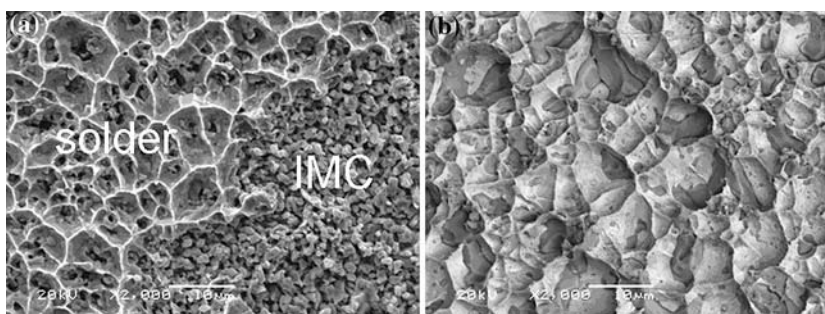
Fracture surface in Sn-37Pb/Ni-P solder joints aged at 170°C for 625 h; failure between solder and Ni_3Sn_4 IMC layer. (a) Substrate side, SE; and (b) solder side, BE.
